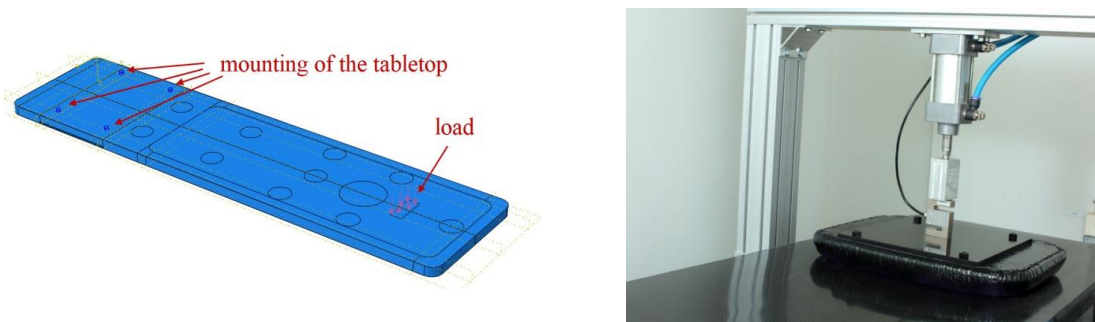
Testing of tabletop 4: (a) mounting and loading method, (b) laboratory test.
